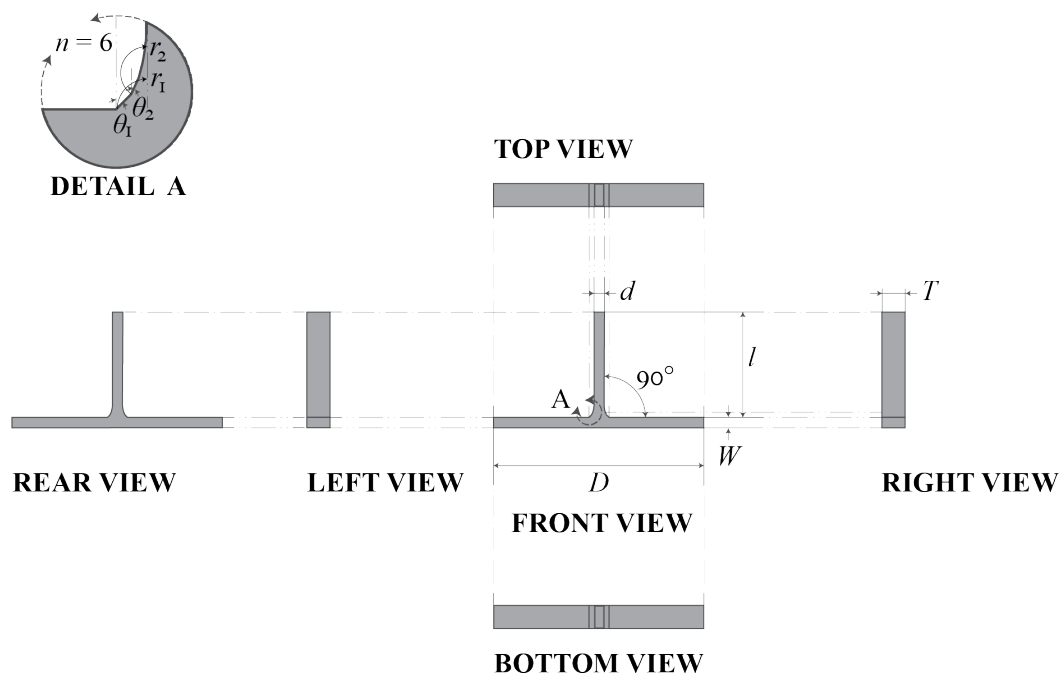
Technical drawing of the Matheek-filleted finite node specimen, employing the American projection convention
